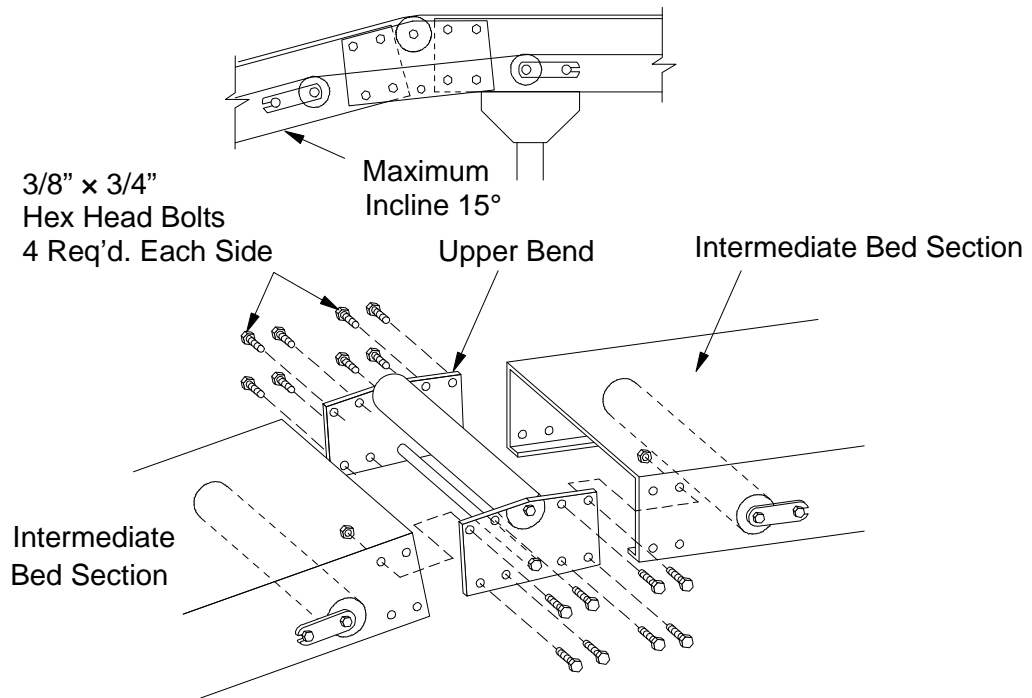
Attaching Upper Bend Unit When Conveyor Has Horizontal Run-Out
